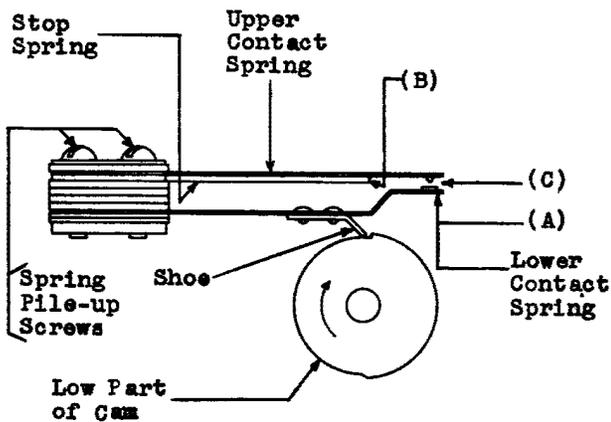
High-speed Cam Assembly — Method of Shoe Pressure and Contact Separation
